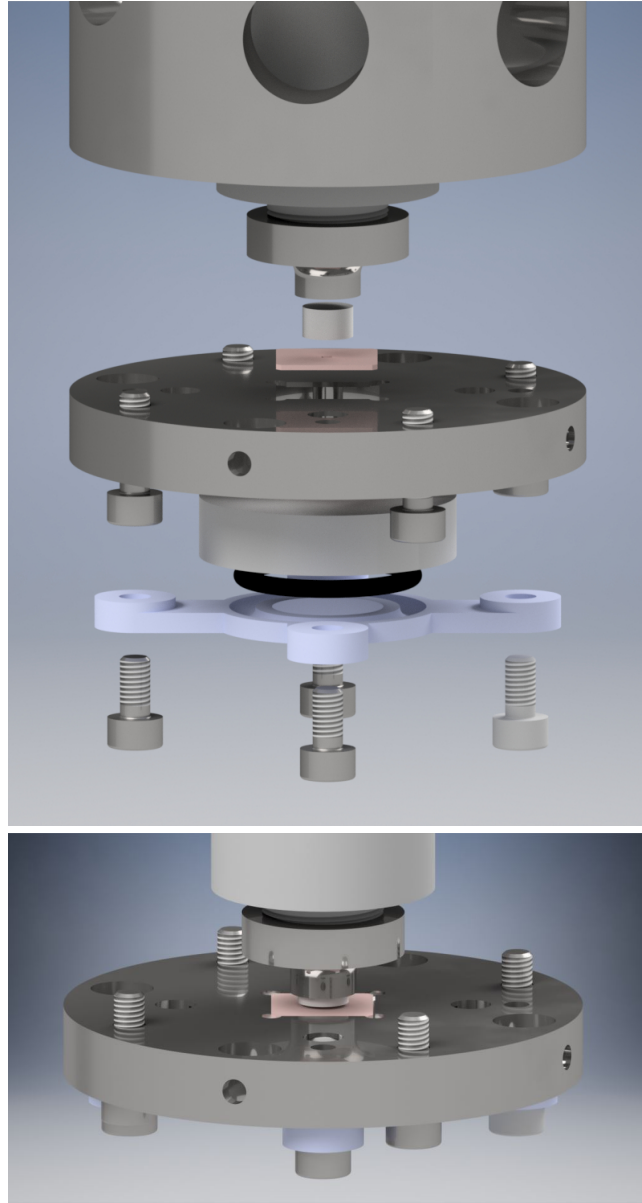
Detailed view of the optomechanical cavity. (top) Exploded view of the optical cavity and on-chip oscillator (in light-red color). Assembly goes as follows: firstly, the incoupling plane mirror is clamped to the cavity structural plate. Then, the on-chip oscillator is placed on top of the plane mirror. The square cut-out in the structural plate provides the rough alignment of chip position ($\pm 0.1\text{mm}$). Eventually, the structural plate is attached to the steel cylinder which supports the end mirror assembly. Finally, the spherical mirror is attached to the piezo actuator which is mounted to the XY stage. The XY stage is used to align the center of the cavity over the trampoline. (bottom) Final configuration of 1 mm long cavity (The steel cylinder is omitted in this view).
